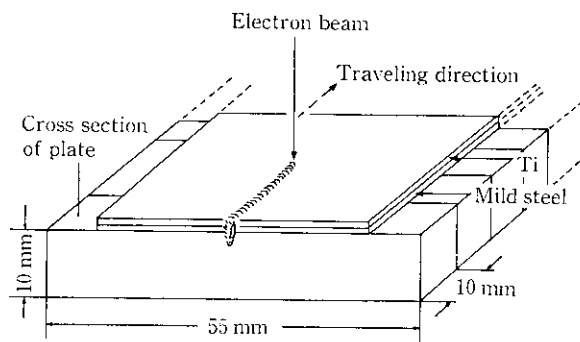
Preparation of the specimen having brittle weld crack
